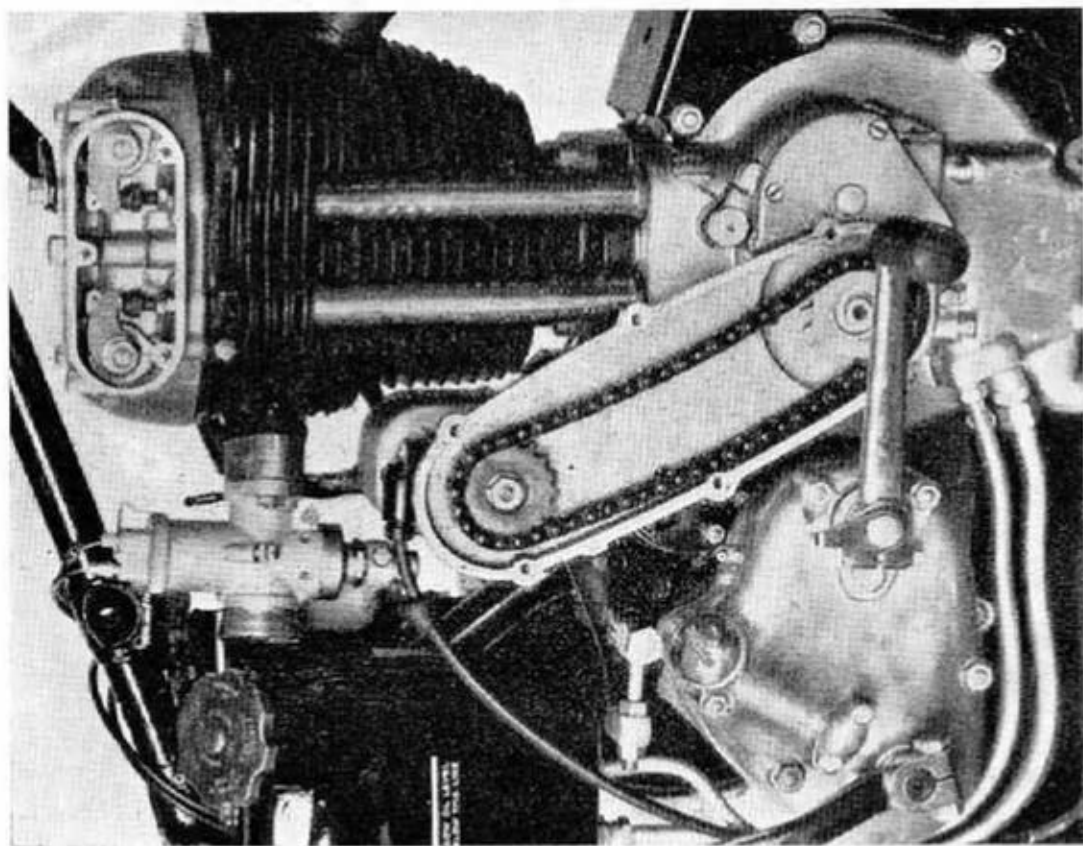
MATCHLESS ENGINE WITH MAGNETO CHAIN CASE AND ROCKER-BOX COVERS REMOVED FOR CHECKING CHAIN TENSION AND MAGNETO TIMING
